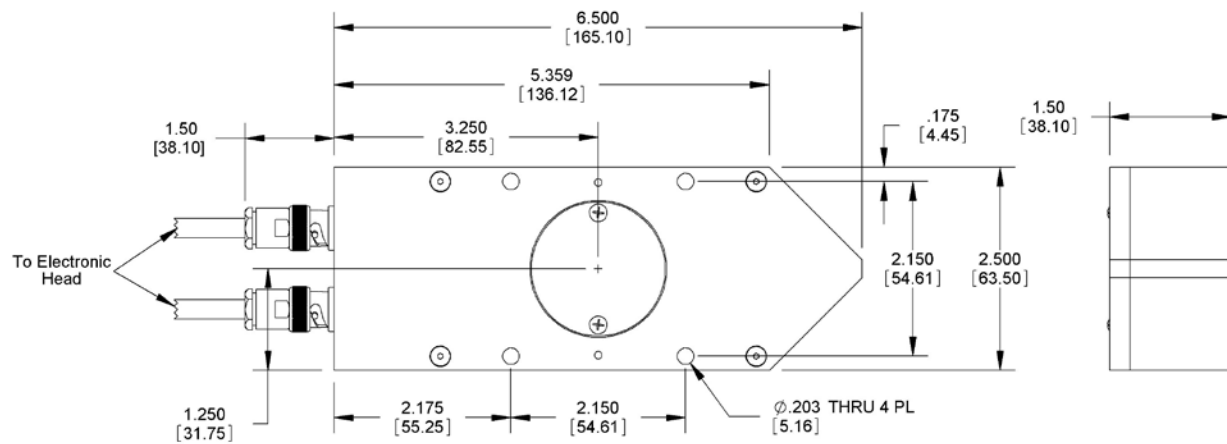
Model II/ZS50 Optical Head Dimensions
